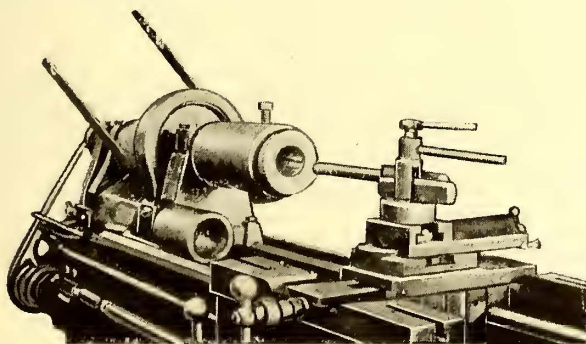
Application of Cylindrical Chuck for Boring Bearings
